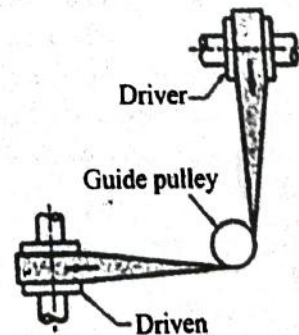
(b): Quarter turn belt drive with idler pulley
